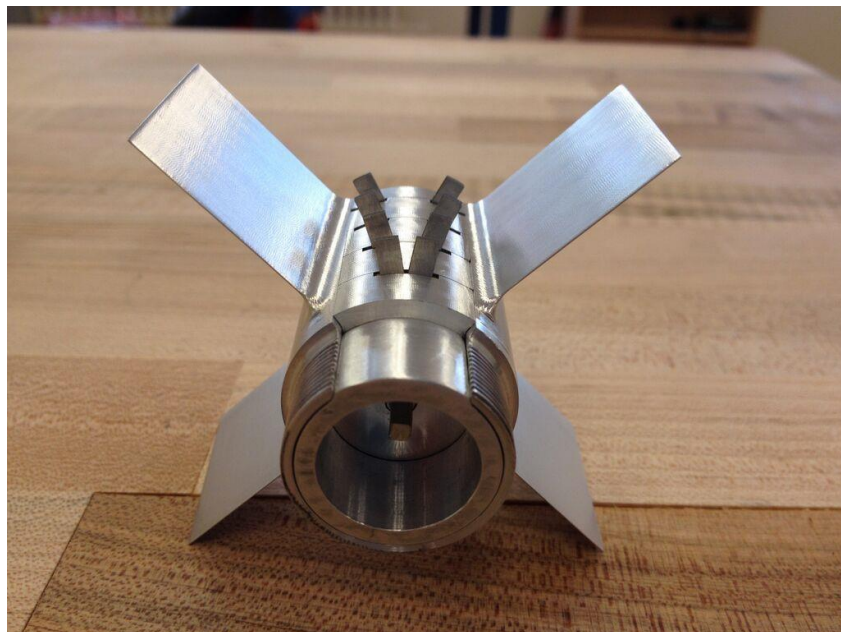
Fully Assembled Active Microspoiler Assembly in Aft Section of Projectile.
